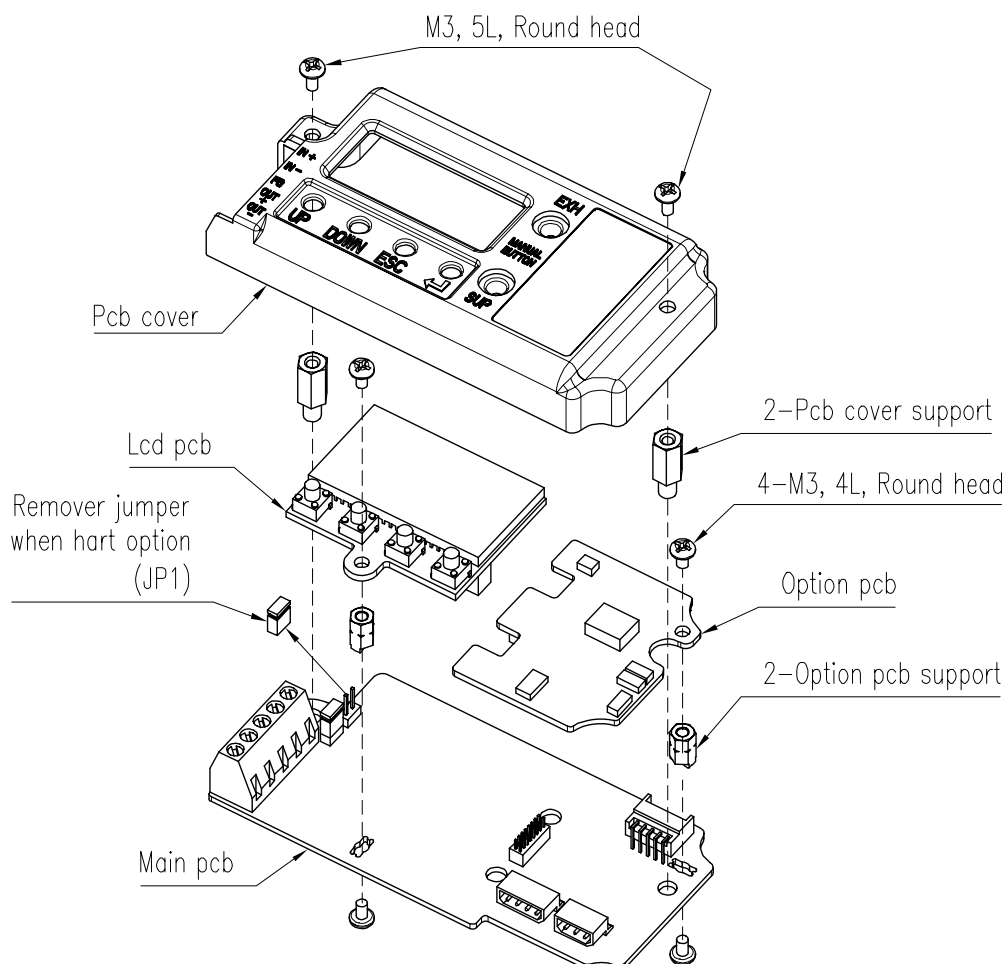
Installation of Optional sub-PCB on Main PCBs
